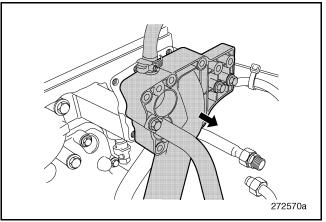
Upper Coolant Pipe (Bypass) Housing
